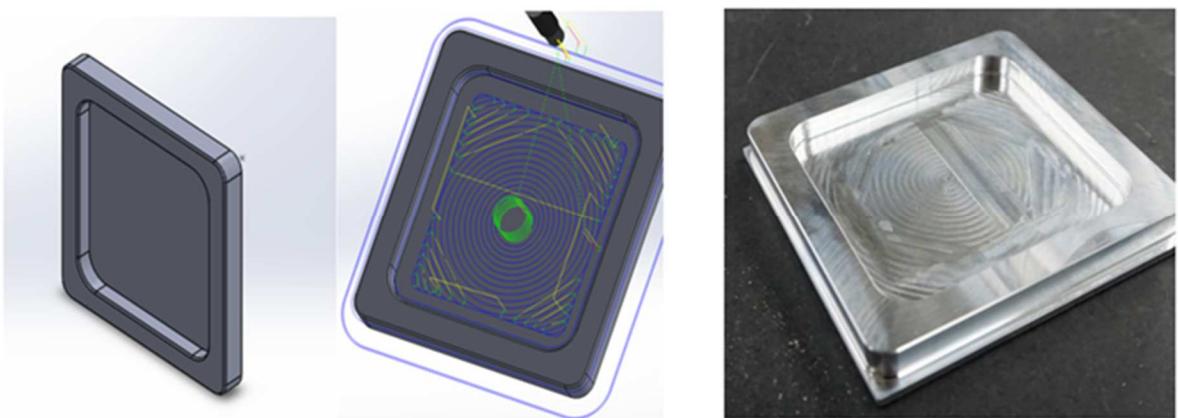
A) SOLIDWORKS CAD file; B) CAM tool path; C) Machined Workpiece
